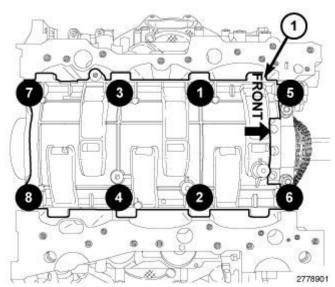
Windage Tray With Main Bearing Cap Bolts Installation Sequence Courtesy of CHRYSLER GROUP, LLC
